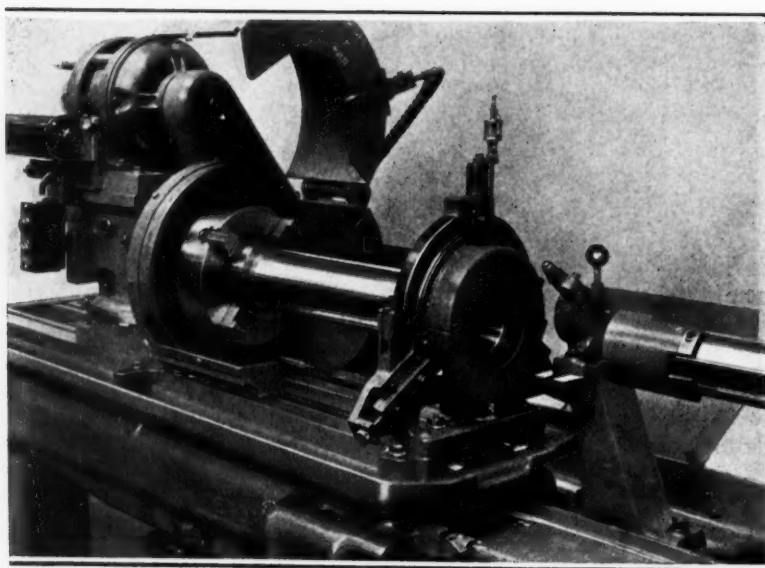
Close-up View of an Internal Grinding Operation on an Airplane Shock Strut Cylinder, Showing Method of Supporting and Driving the Work
